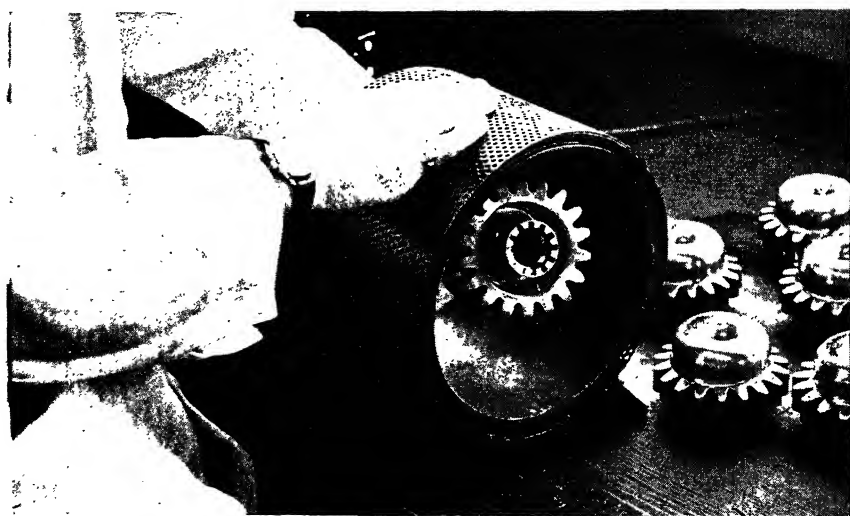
DEMAGNETISING PINIONS AFTER TEST
